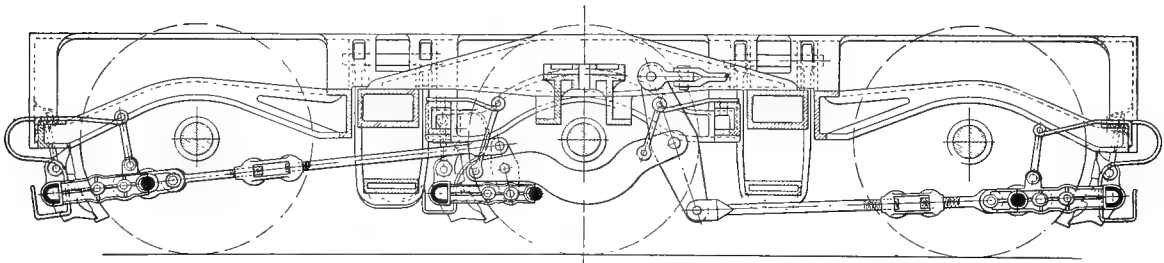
Pullman Standard Arrangement of Brake Rigging for All-Steel Six-Wheel Passenger Train Car Trucks. Chicago Railway Equipment Company.
